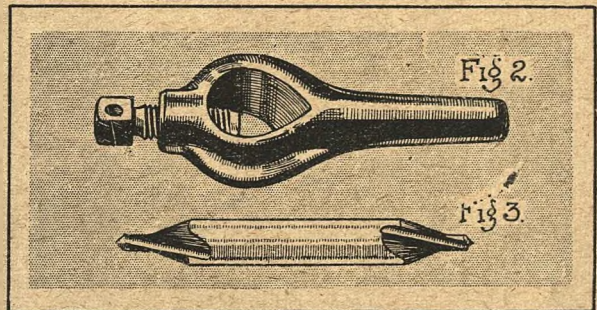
A lathe carrier. Fig. 3.—A Slocomb centring drill.
